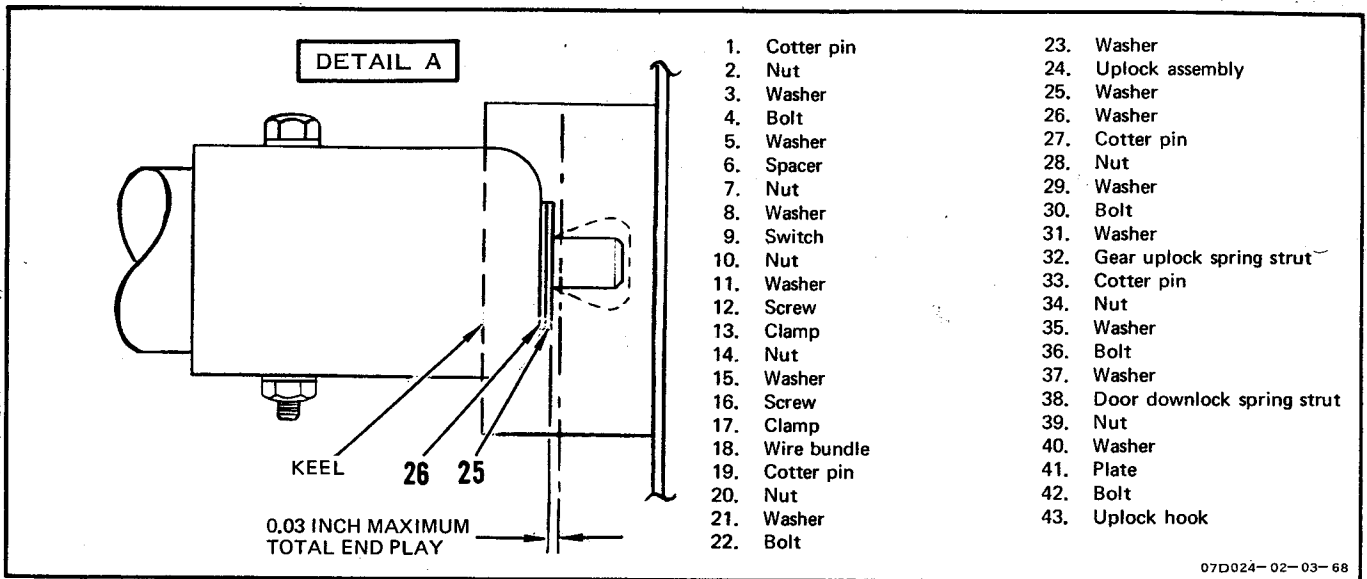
Nose Gear Uplock Removal and Installation (Sheet 2)
